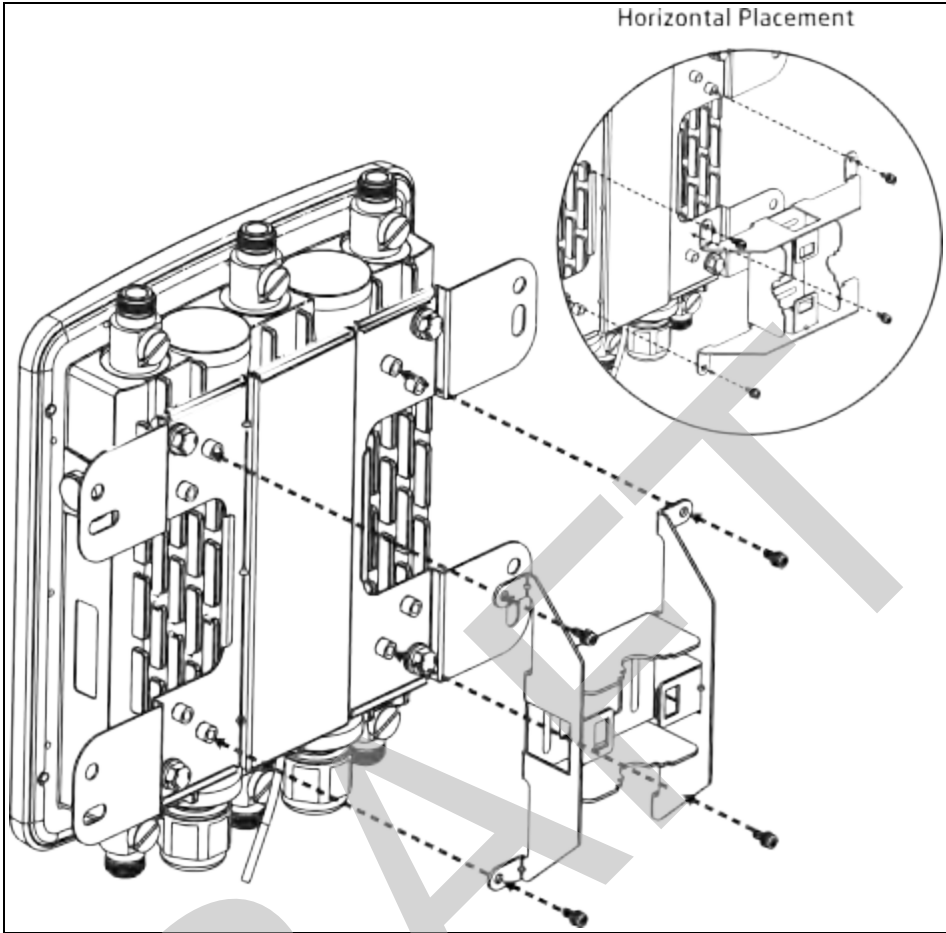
Attach the Pole Mounting Bracket to the Mounting Bracket
